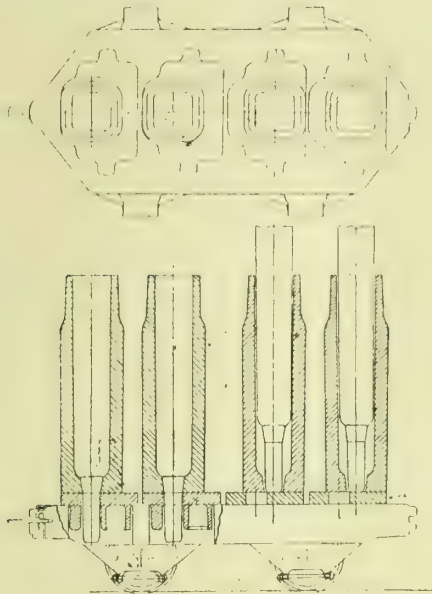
GATHMANN INGOT MOULD AND STOOL ON CAR.
